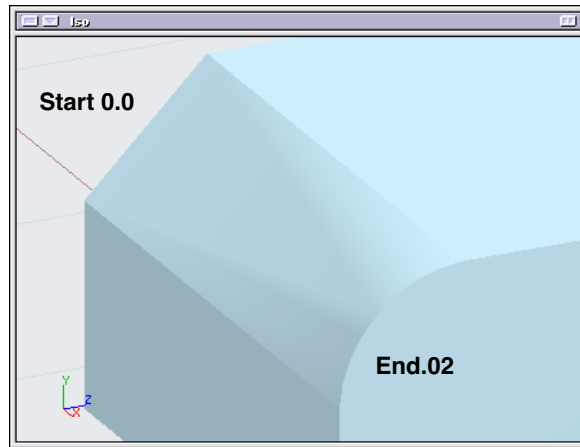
Comparing a beveled and chamfered edge.
